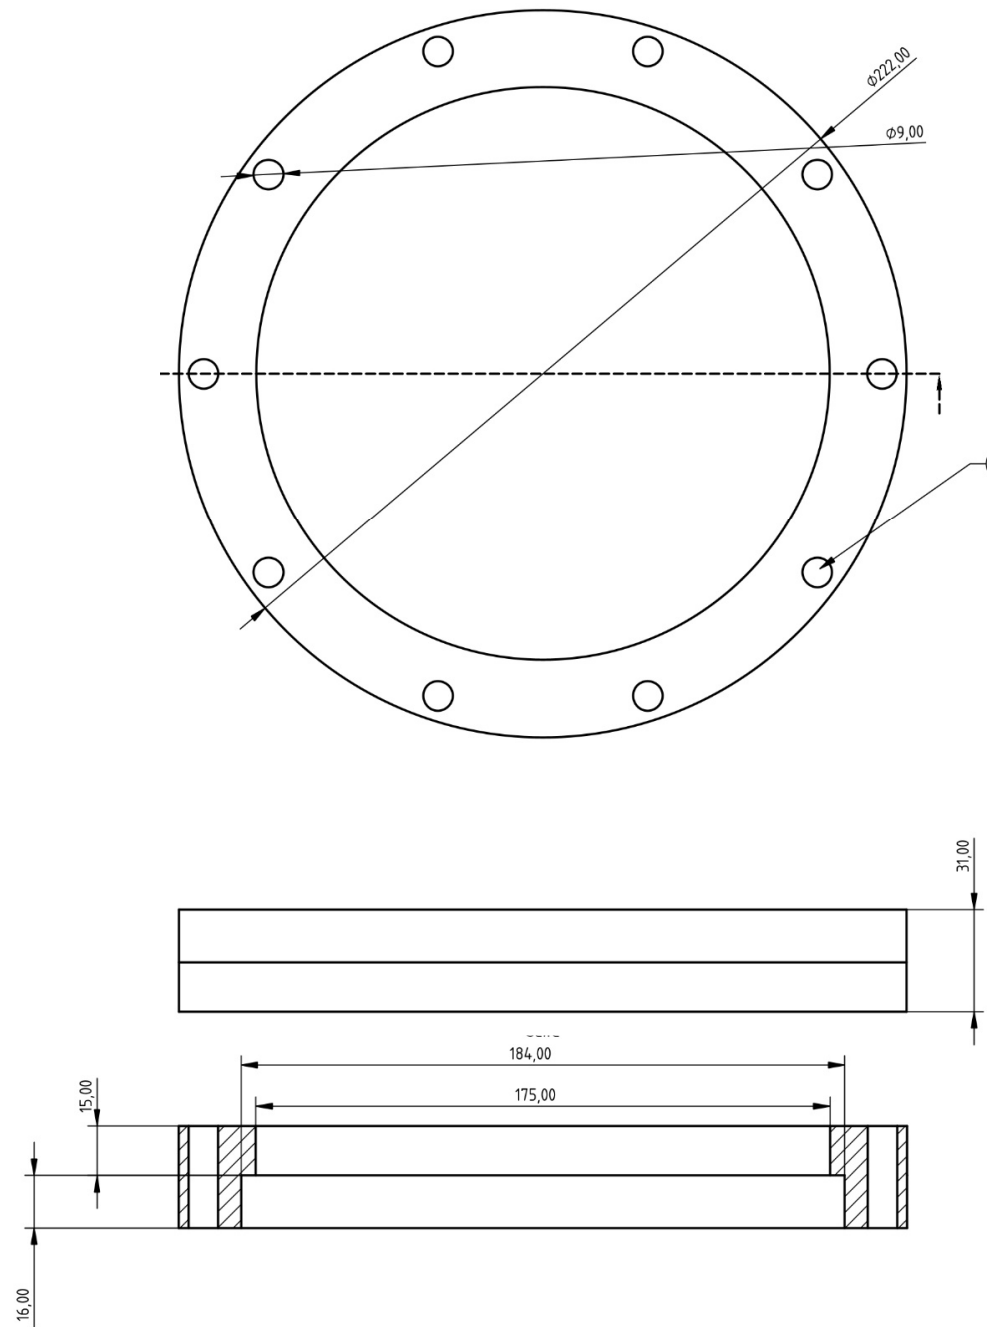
Technical drawing of the sight glass flange weld-in for the biofilm module in top view (top), side view (middle), and cross-section (bottom). Dimensions in millimeters.
